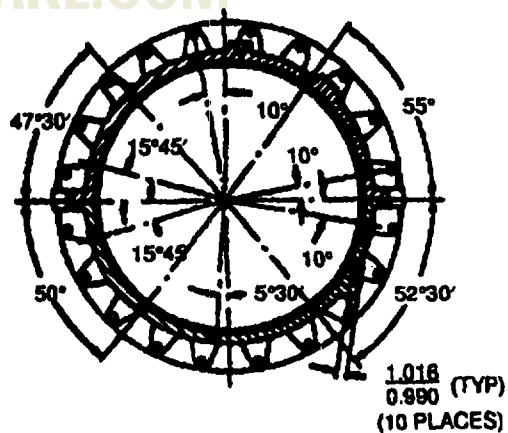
Compressor Housing Machining (Section AH-AH).
